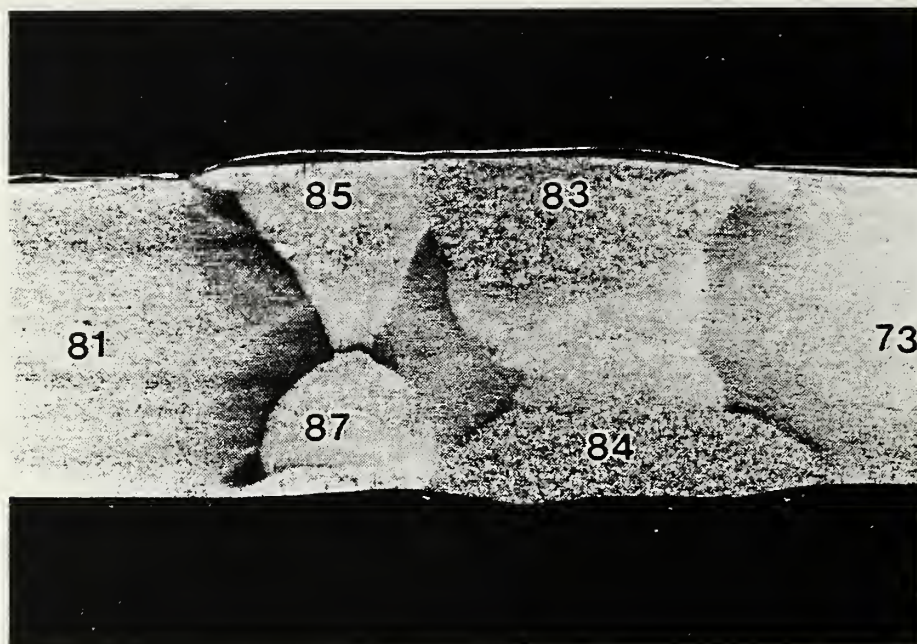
Defects in Horizontal Weld Metal
